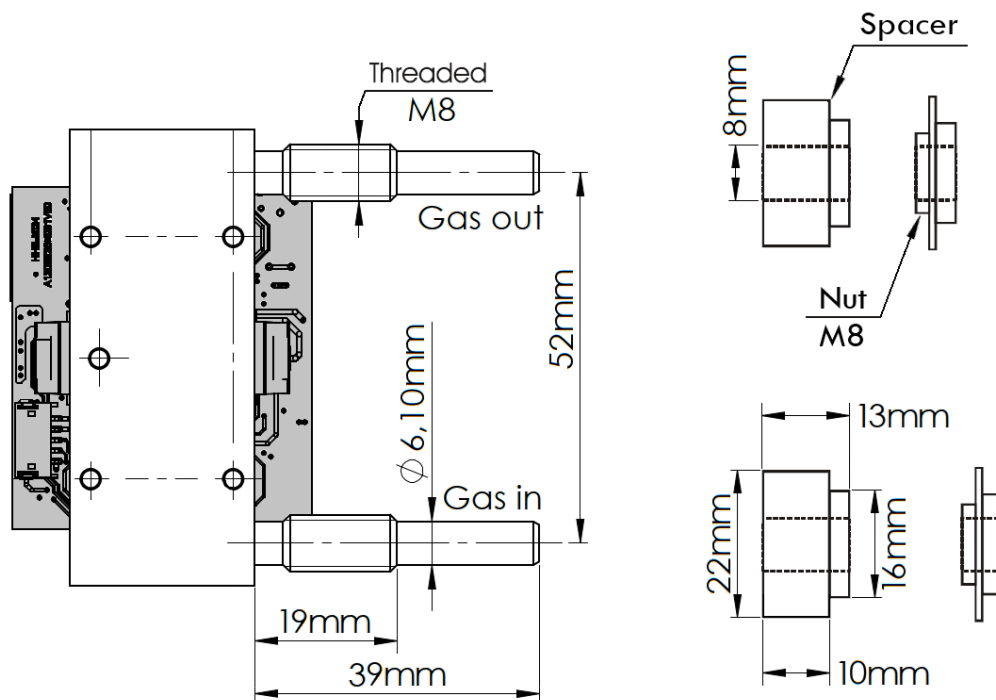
Dimensions of the FTC320-OEM for mounting on 6 mm tubes.
